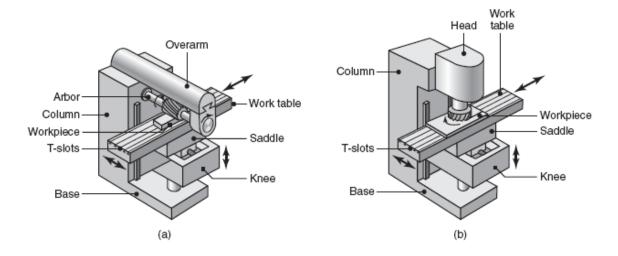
(a) Horizontal-spindle column-and-knee type milling machine, (b) vertical-spindle column-and-knee type milling machine [7]
